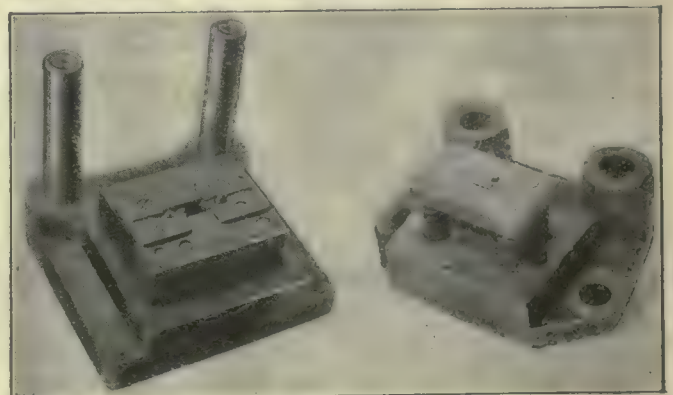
PRESS TOOLS FOR SHAVING THE CAM
